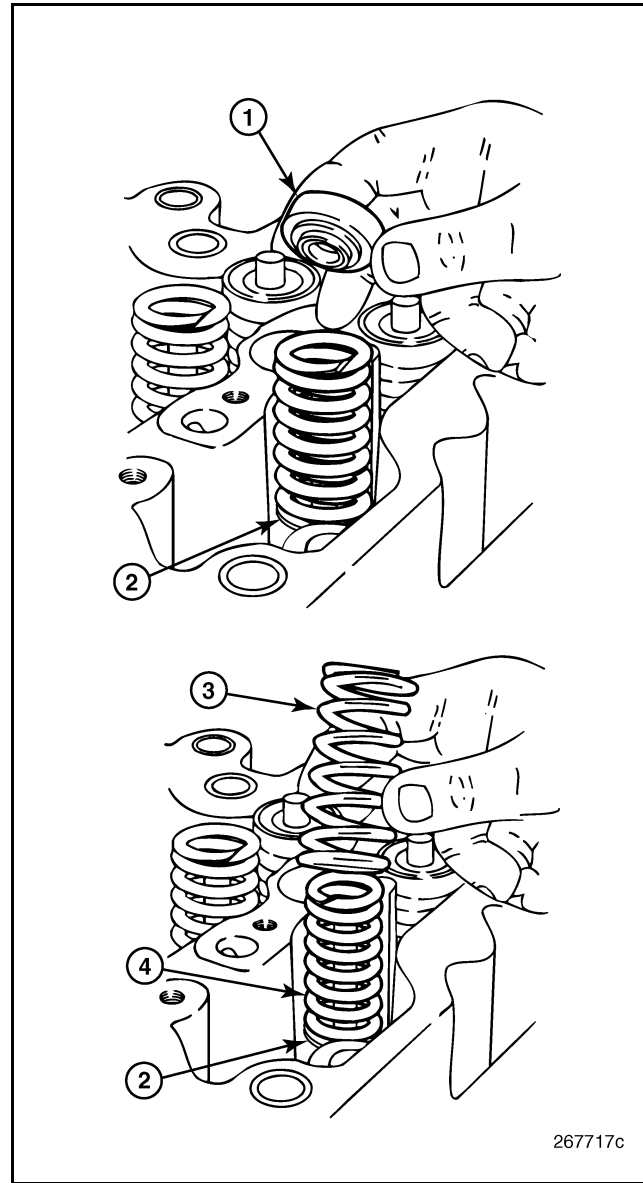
Tip-End Rotator and Spring Removal (Non-Current Design)
